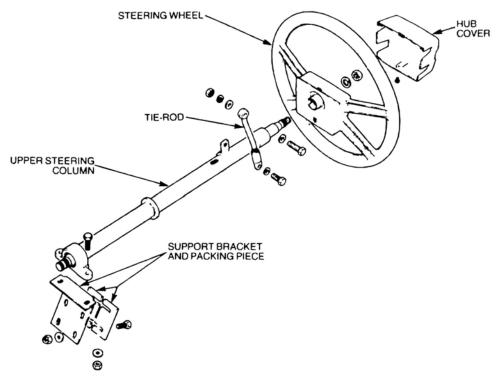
Steering Wheel, Column and Upper Shaft Assembly
